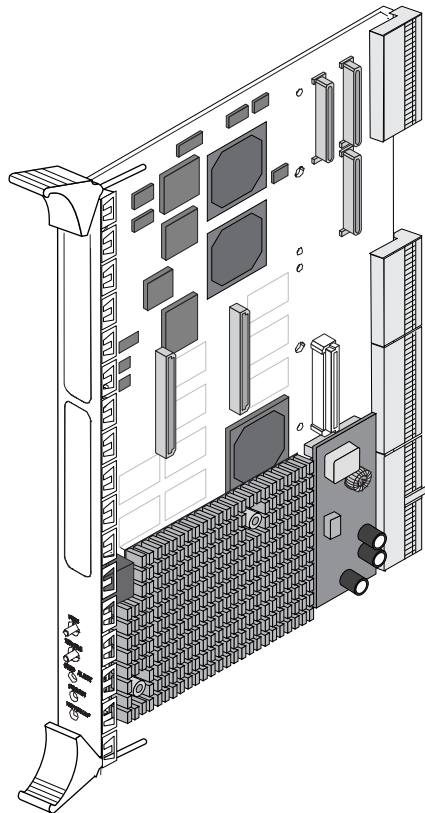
Typical Netra CP2080 Board Assembly with Heatsink
